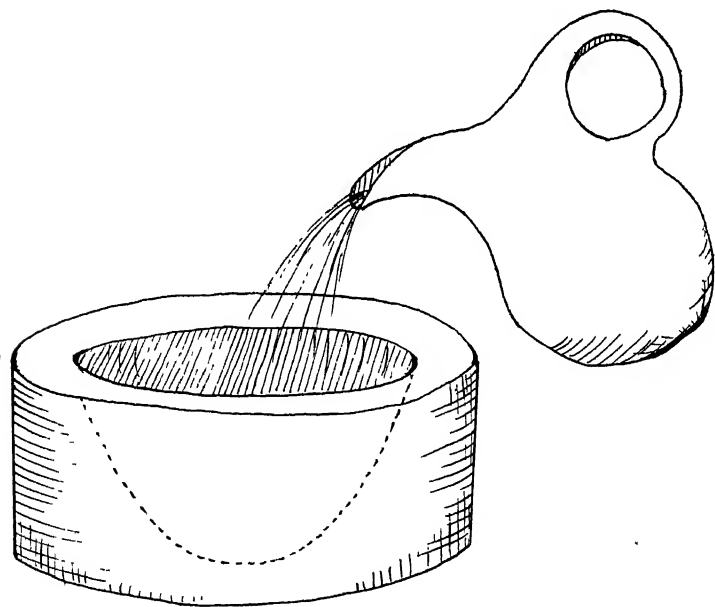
Pouring Loose Slip into Dry Plaster Mold
